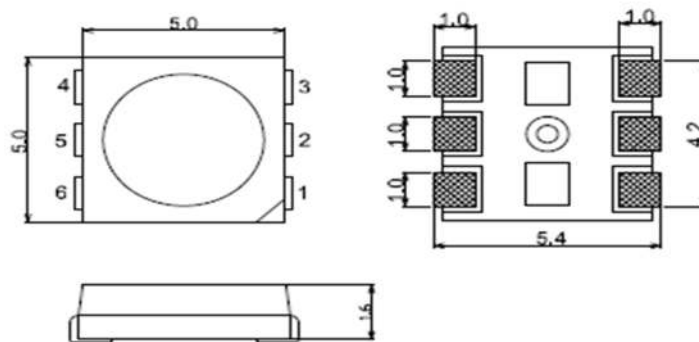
IN-PC55TBTRGB Package Outline Dimensions
